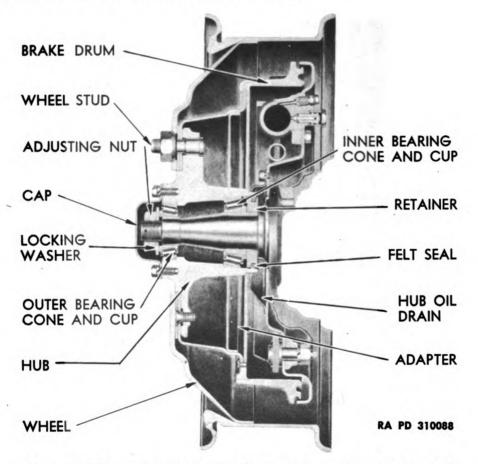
Front Wheel, Hub, and Drum, Cross-sectional View (6 x 4) (Demountable-type Drum)
